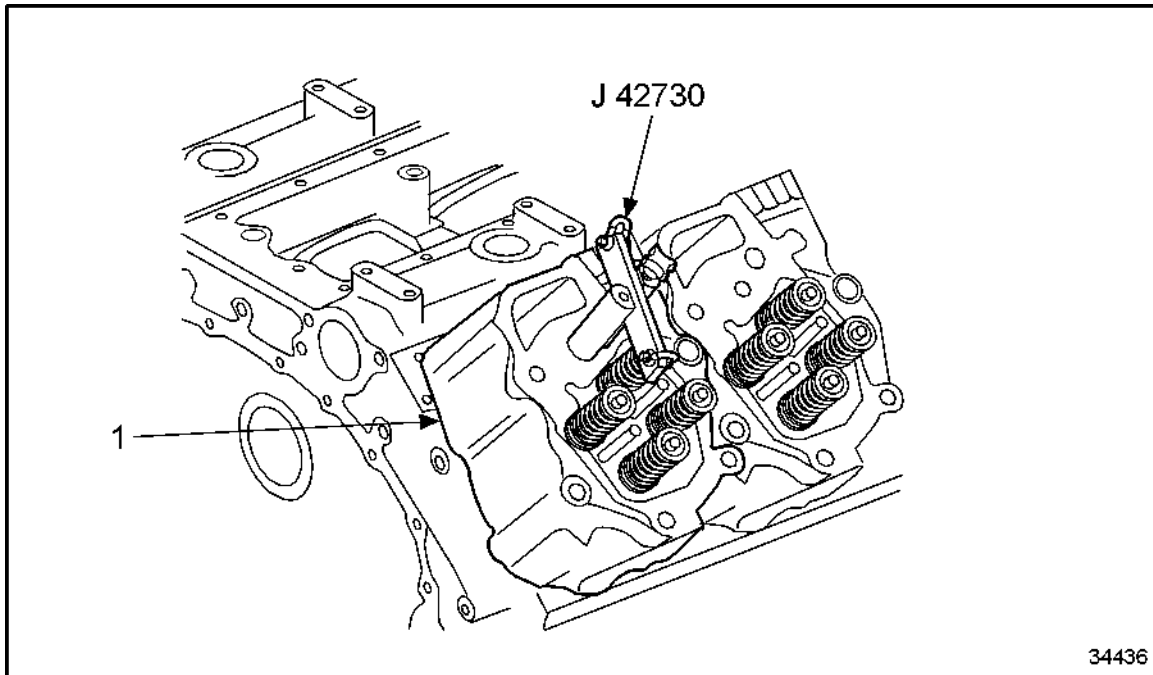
Unscrewing Hex Bolts on Cylinder Head
